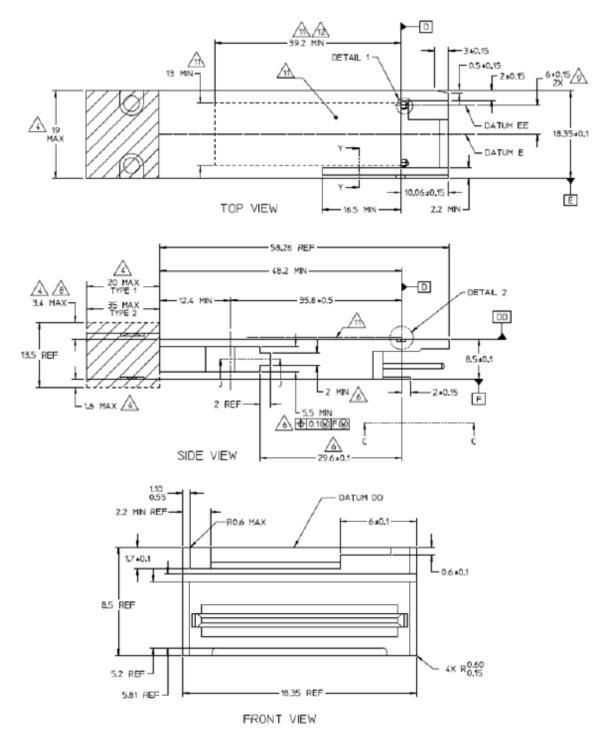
FTCD1323E1PCL Mechanical Dimensions.
